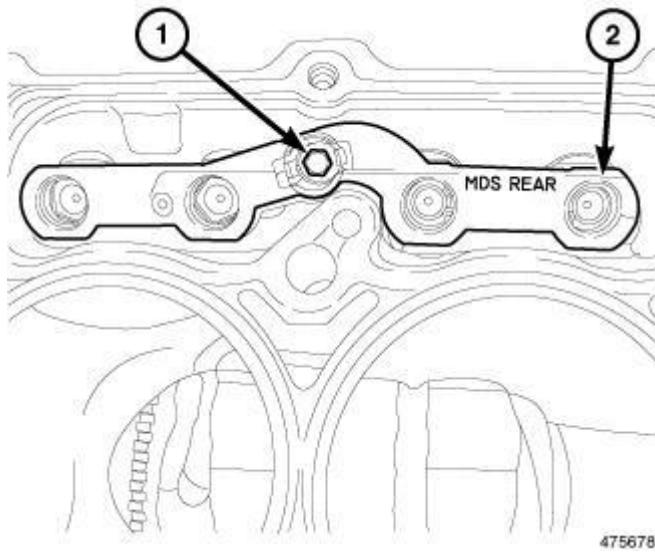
Rear Multi-Displacement System Lifter Assembly
